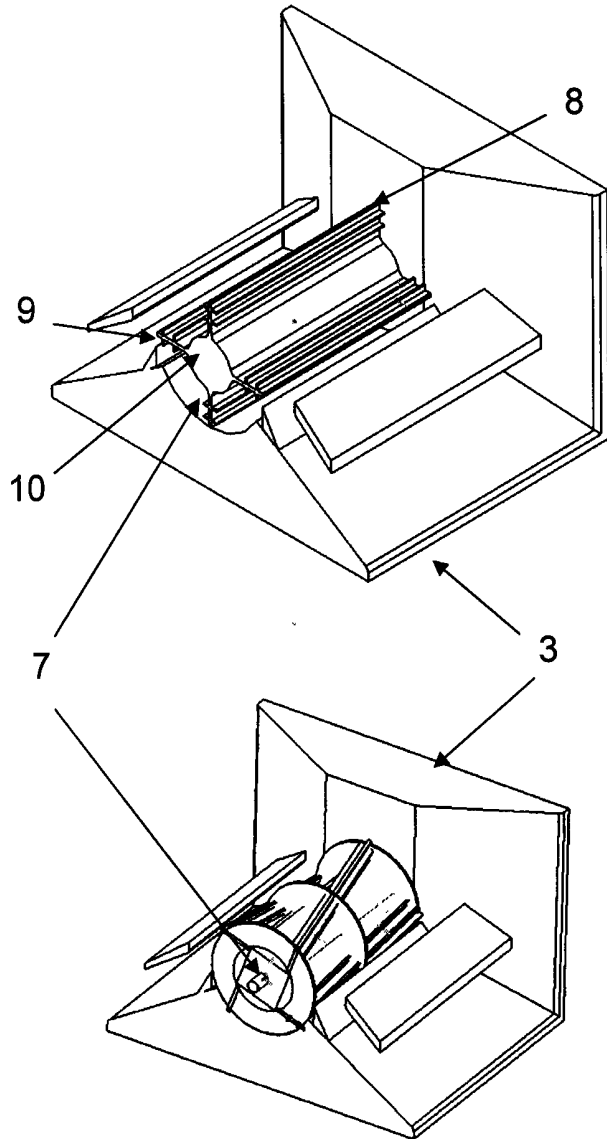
Isometric Sectional View of Rotor Assembly and Flow Guide Profiles
